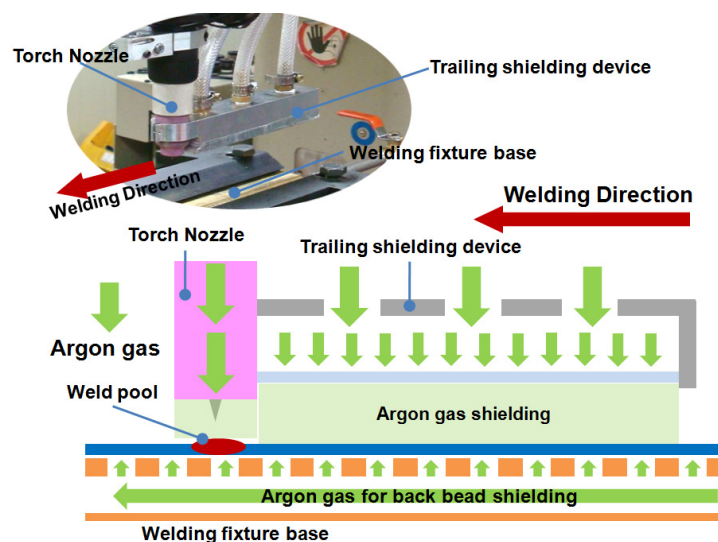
Illustration of out-of-chamber welding test equipment.
